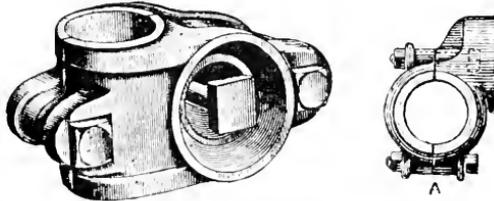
CLAMPS FOR INGERSOLL DRILL.
